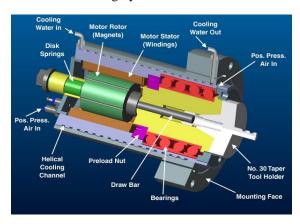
Major Mini-Spindle components and layout.[15]
